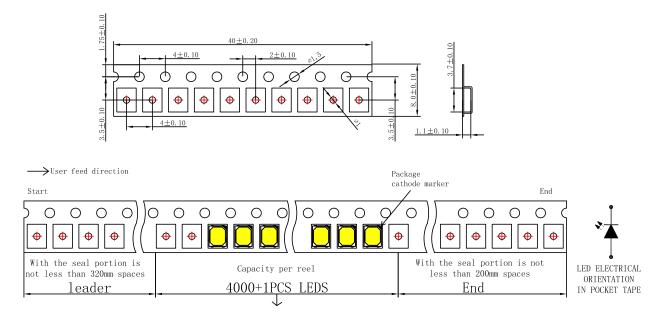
Pocket tape dimensions for LUXEON 2835 Line.
